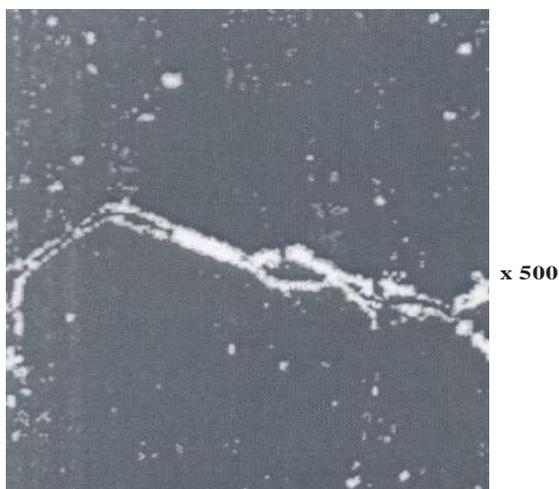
Pitting Corrosion and Cracks in Weldment.
